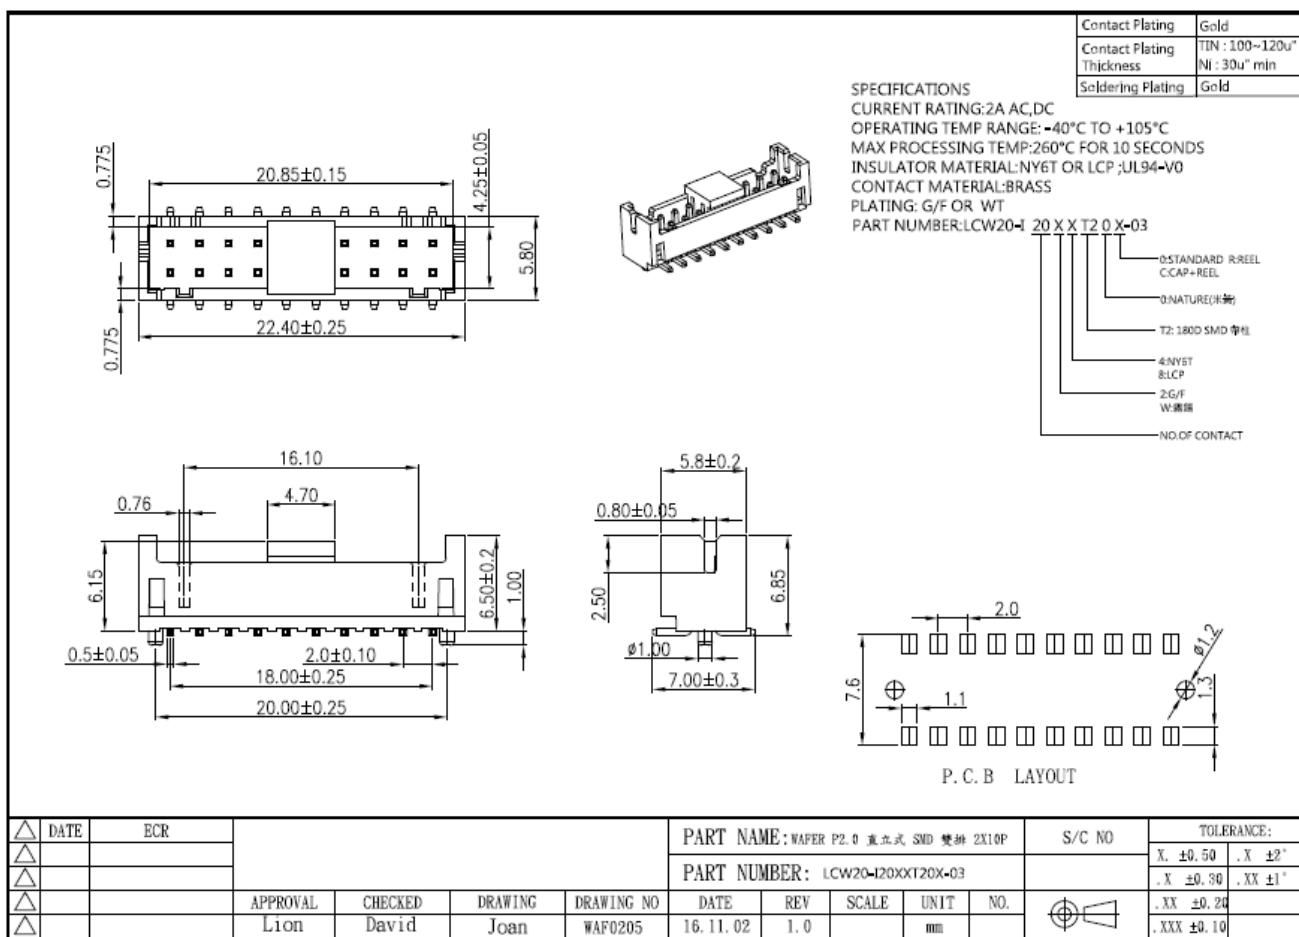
Wire to Board SMD 2*10P Connector Drawing
